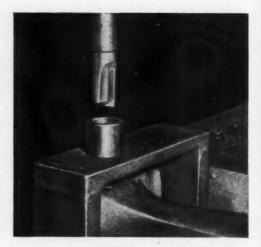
A special tool, fitted with a 2-edged cutter blade of tungsten carbide, is employed on a bench drill for opening out a cored hole for the take-up lever in one side of the casting
